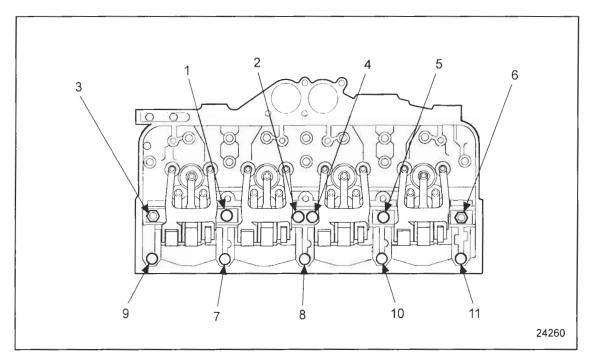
Camshaft Cap and Rocker Arm Shaft Bolt and Nut Torque Sequence
